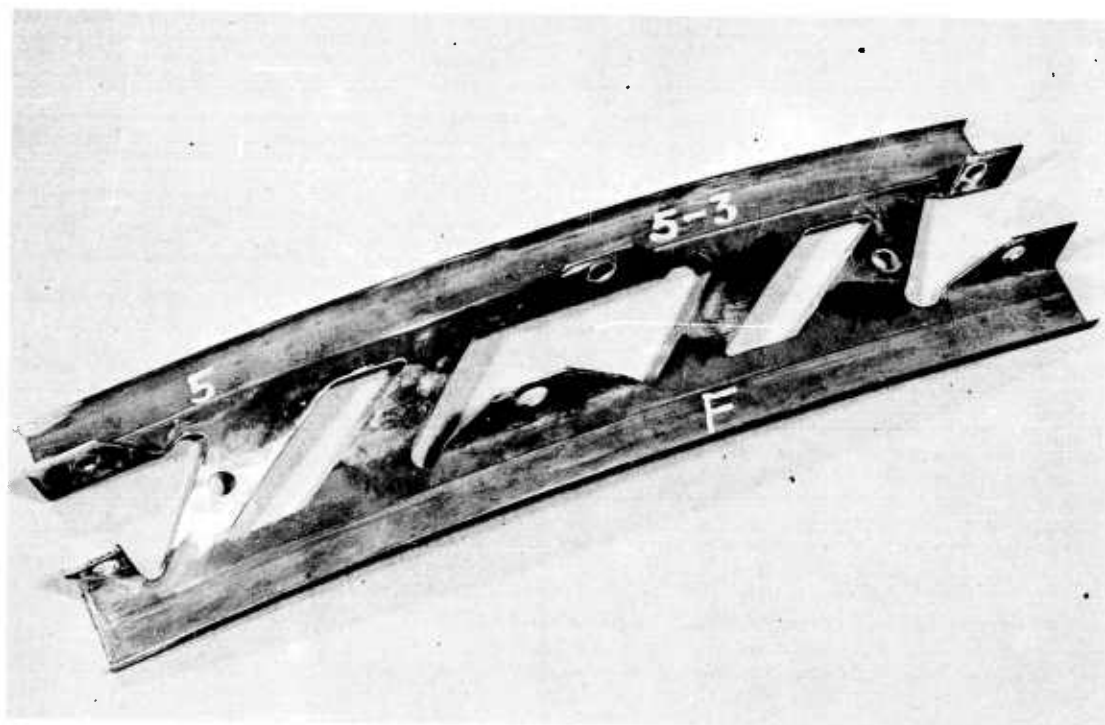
ROTATING SEAL SEGMENT (DESIGN 'A')
